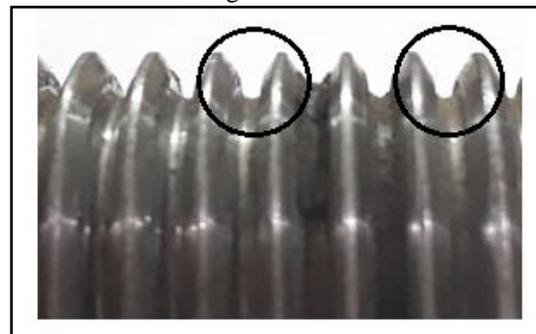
Front View of Bolt Specimen with 1mm Undercut. (Undercut is shown within Circle)
